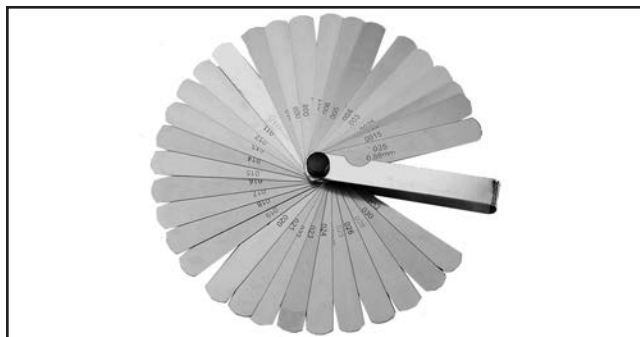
G9616 Feeler Gauge Set - 32 Pc.
